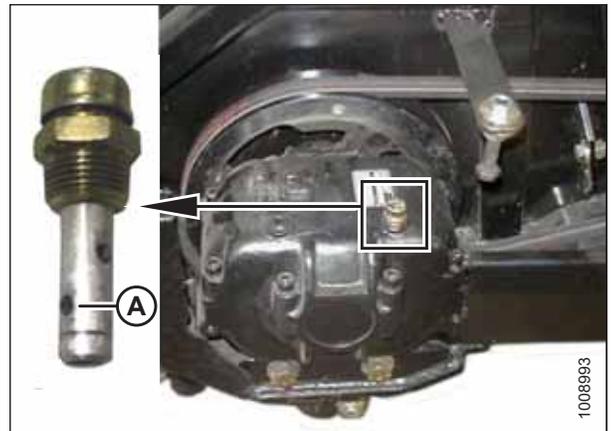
Side View of Knife Drive Box and Close-up of Dipstick
